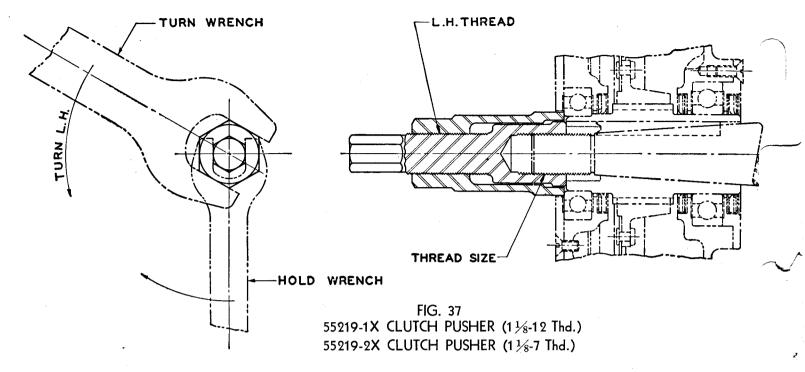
55219X CLUTCH PUSHER is a combination tool to hold the armature shaft and push the clutch securely on the taper. It may be obtained from Spicer Manufacturing and can be used for both the safety and automatic clutches, but not the 50003 Safety Clutch. It is particularly adapted for the automatic clutches as these cannot be held by other means. The pusher can
